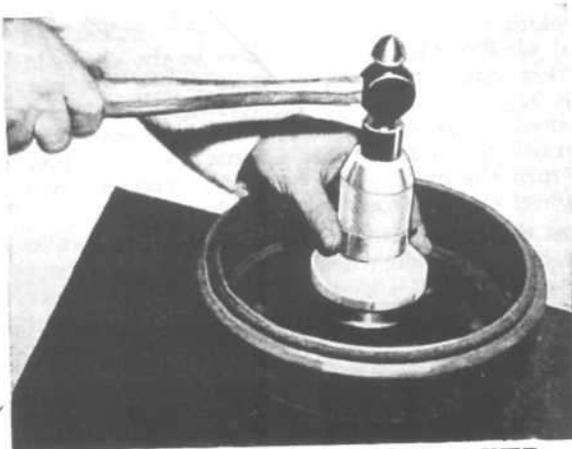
WHEEL HUB OIL SEAL DRIVER
